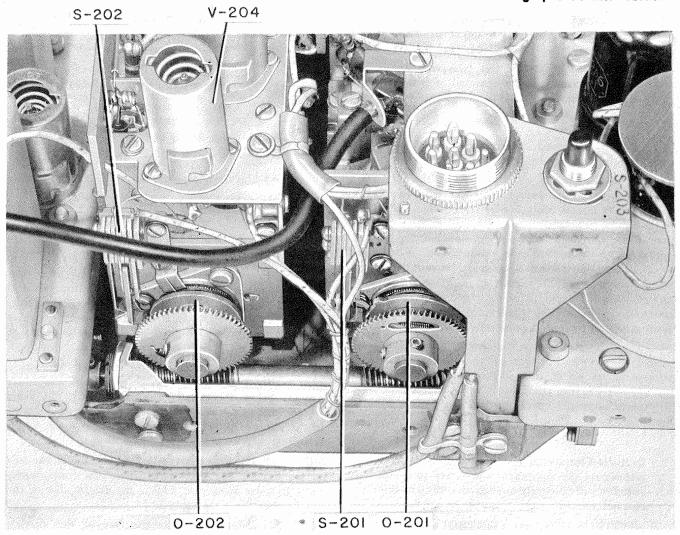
Radio Receiver—Showing Variable Capacitors, Drive Shaft, Cams, and Switches
